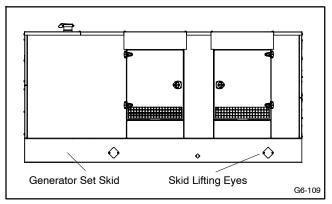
Typical Enclosure Attached Directly to the Generator Set Skid
